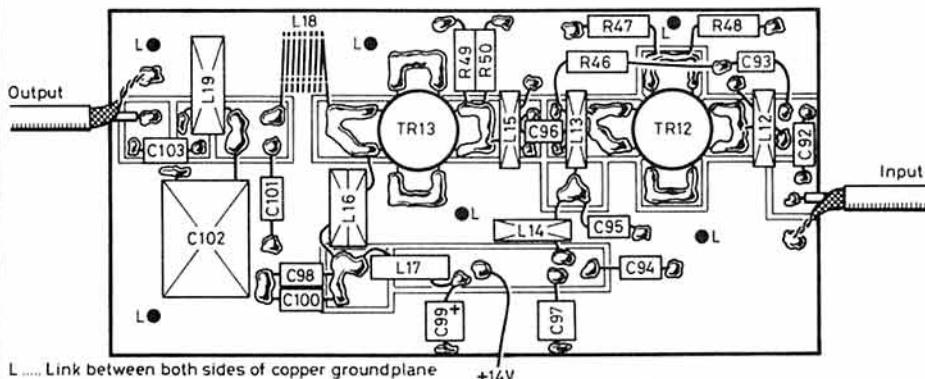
PA BOARD COMPONENT LAYOUT. L = LINK BETWEEN BOTH SIDES
